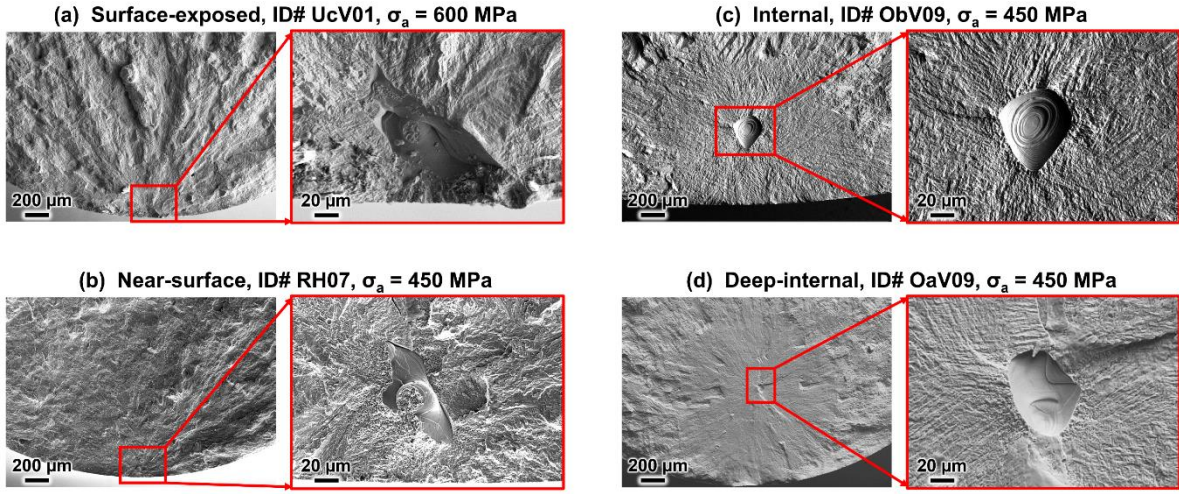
Fracture surfaces of L-PBF Ti-6Al-4V specimens for (a) surface-exposed, (b) near-surface, (c) internal, and (d) deep-internal crack-initiating defects.
